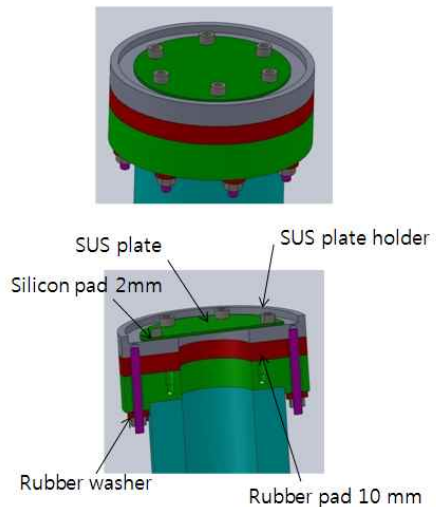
Schematic of the installation part of a steel plate which a multi-layered decoupling material will be attach to.
